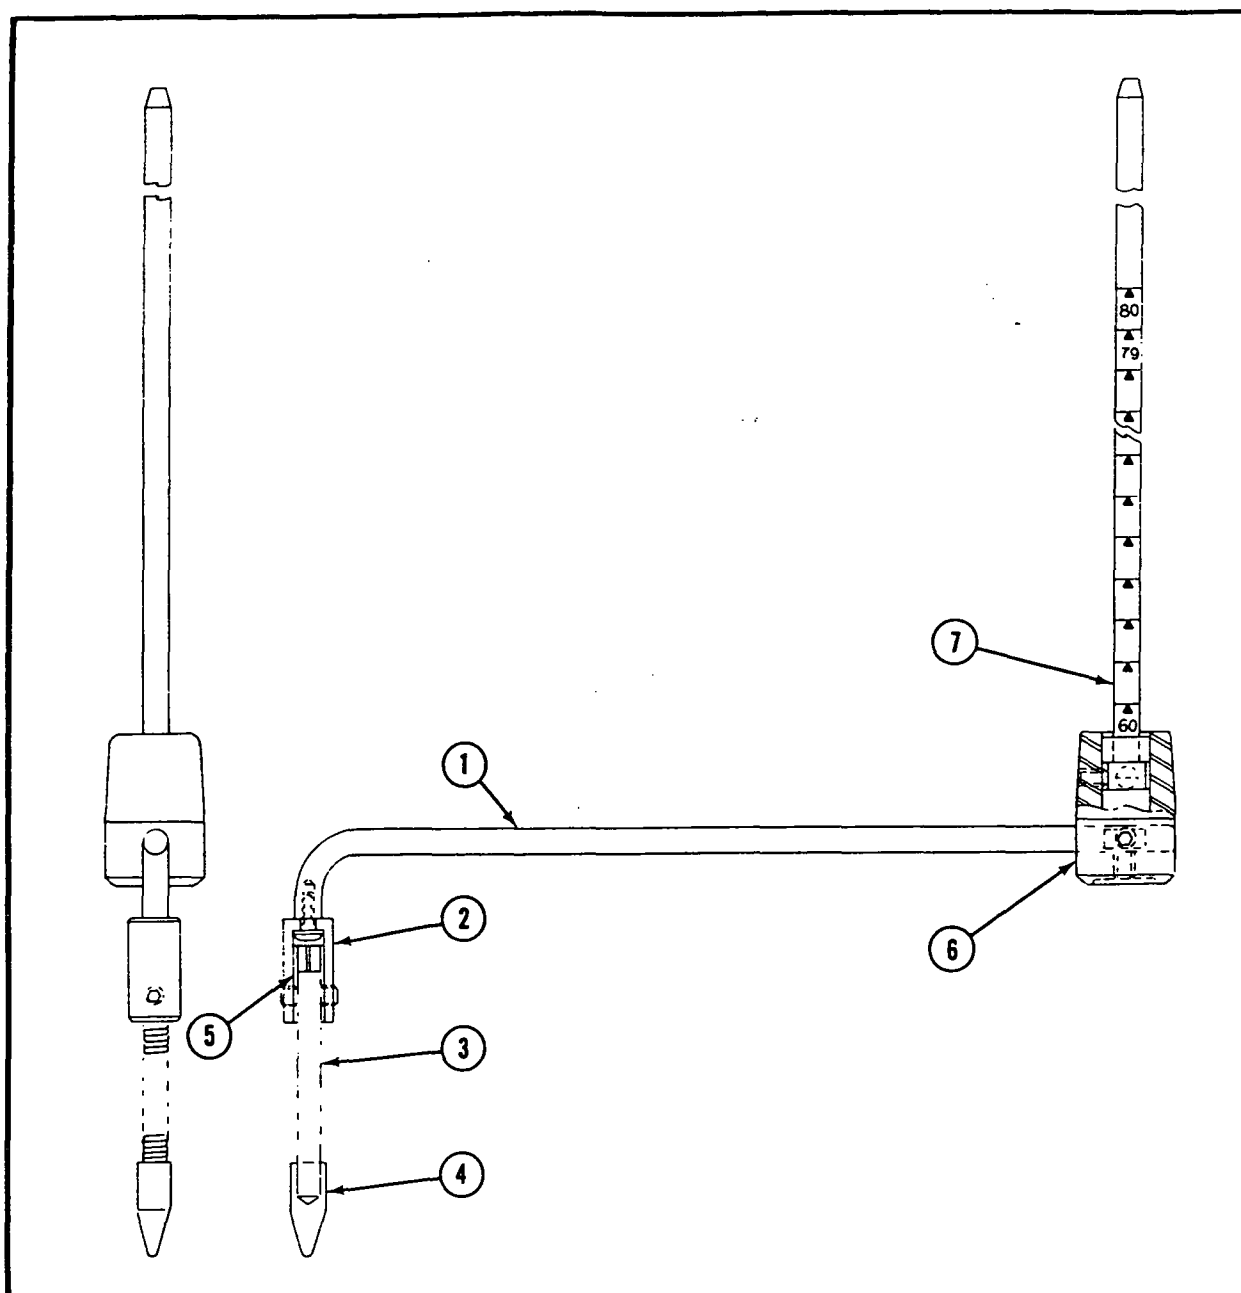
COBALT, FRONT-FINAL POINTER ASSEMBLY
